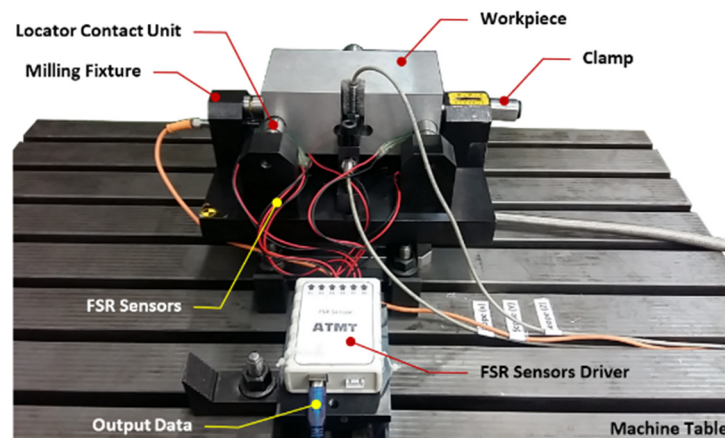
Workpiece-fixture system equipped with FSR sensors
